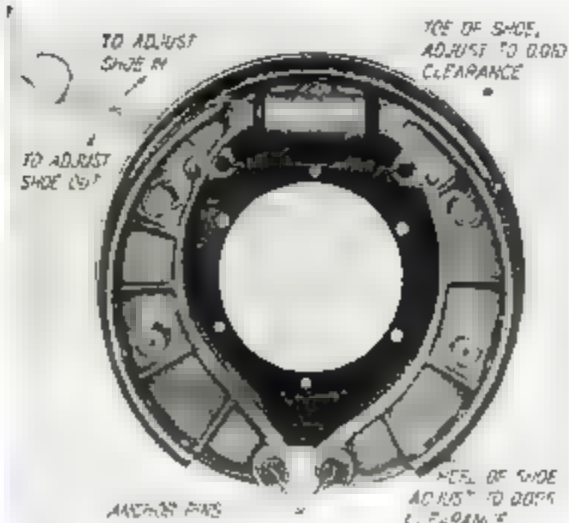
Brakeshoe clearance should be carefully checked to see that it conforms to figures given here.
